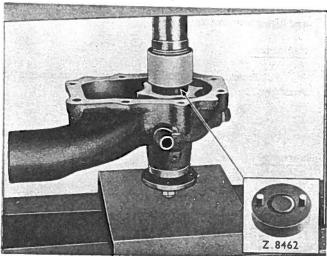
Pressing on the pump rotor, using the installer shown inset. The installer pegs engage the rotor.
